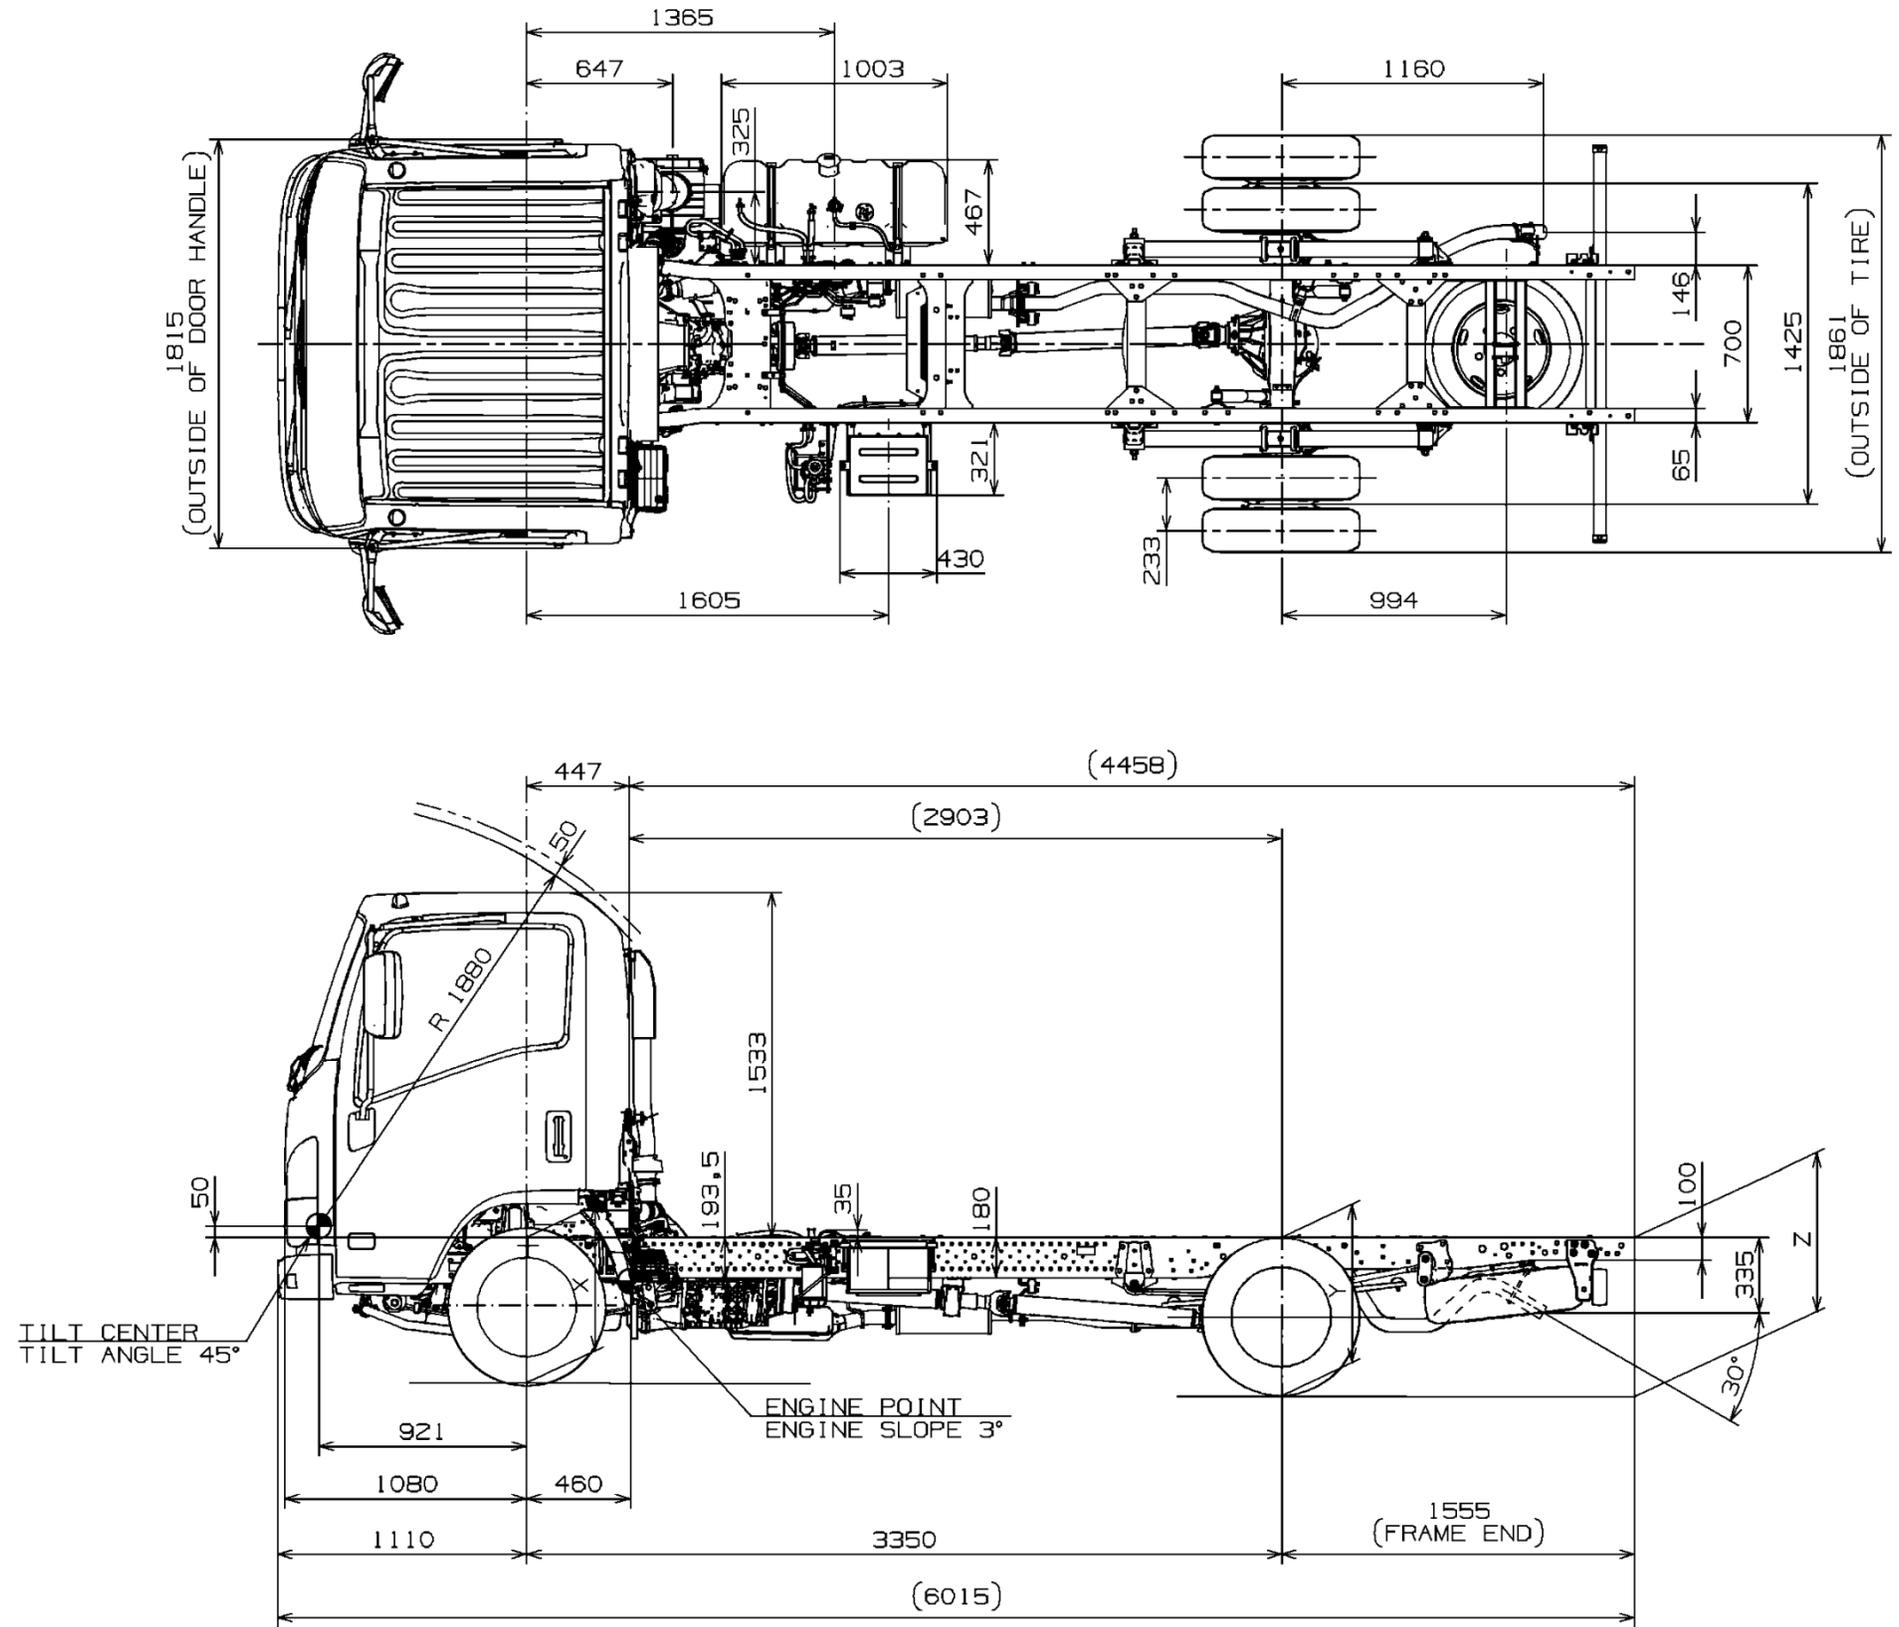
Cab Chassis Drawing NNR85L/U-FD5AYEN
